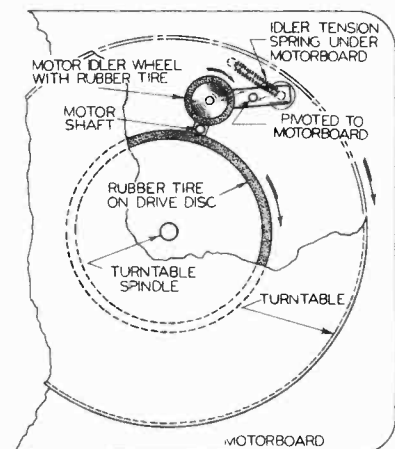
The rubber-tired drive disc fastened to the under side of the turntable is driven by the motor shaft, which is maintained in contact with the drive disc by pressure of the idler wheel.
